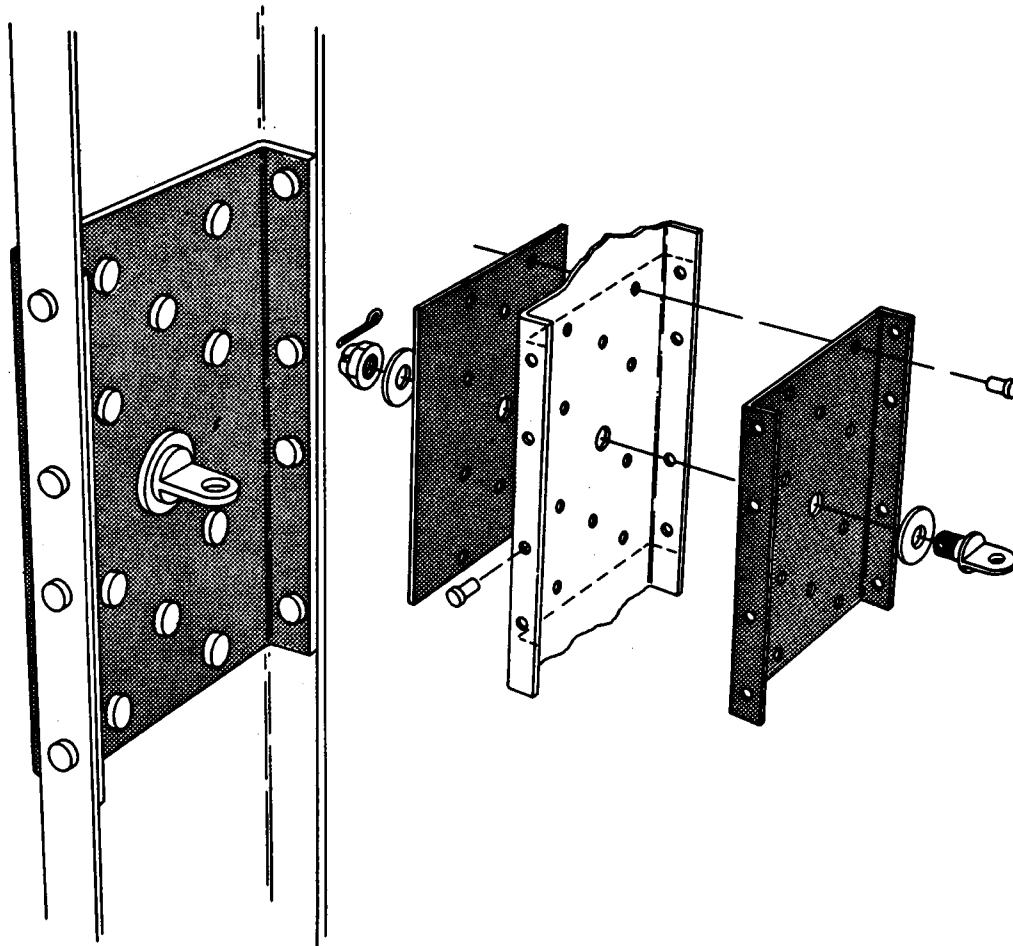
Typical bulkhead reinforcement installation.
